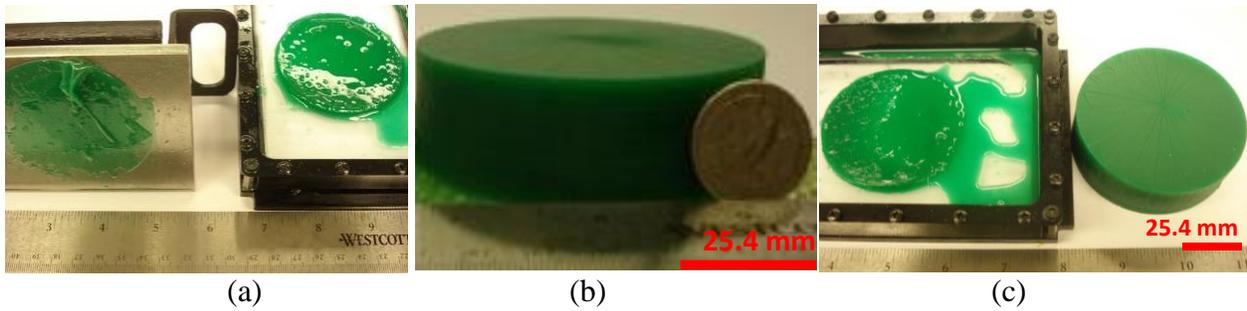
(a) Failure of printing a 75mm diameter cylinder using commercial machine. Part was pulled down from the platform due to large separation force and stick on the constrained surface (b) Success of Printing a 75mm cylinder using a textured constrained surface based testbed. (c) Comparison between the failed part stick on the constrained surface of the commercial machine and successfully printed part using the textured constrained surface
